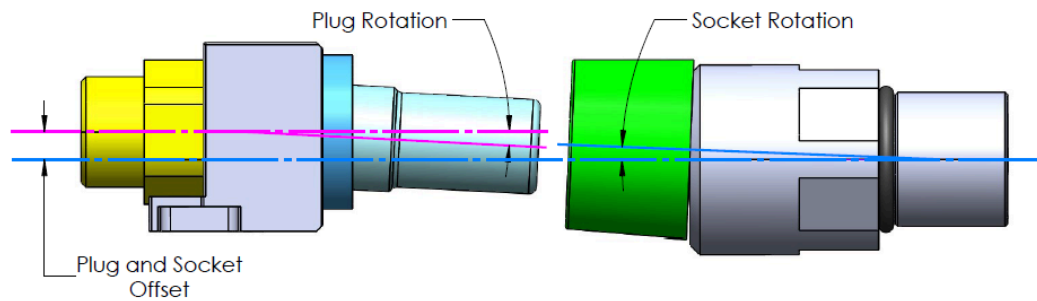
Plug and Socket Rotating to Accommodate Misalignment
